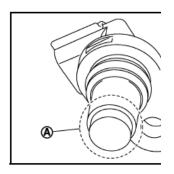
Identifying Camshaft Position Sensor (Phase) Courtesy of NISSAN NORTH AMERICA, INC.
